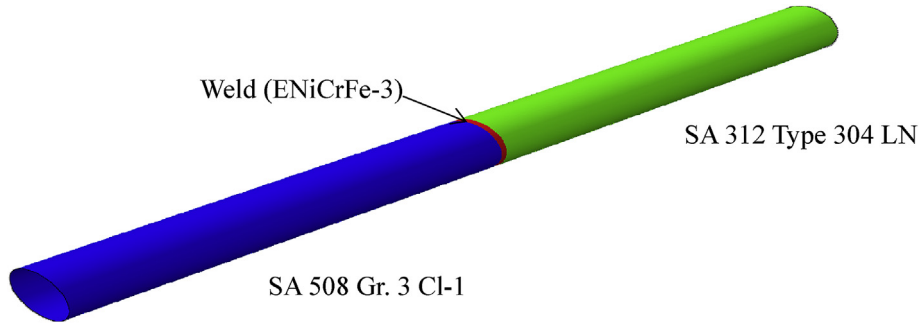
Schematic diagram of bi-metallic pipe weld joint.
